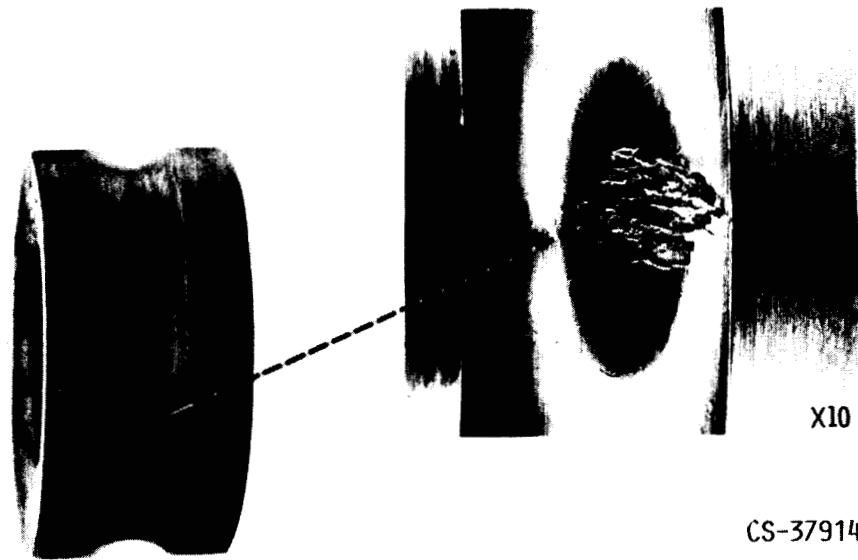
TYPICAL FATIGUE SPALL IN BEARING RACE.
